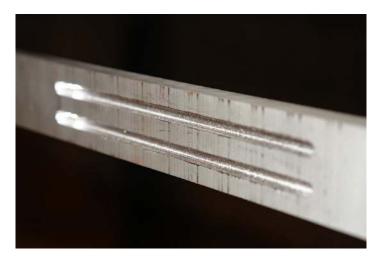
Close-up of Test Sample Bar With a Milled Cross Section
